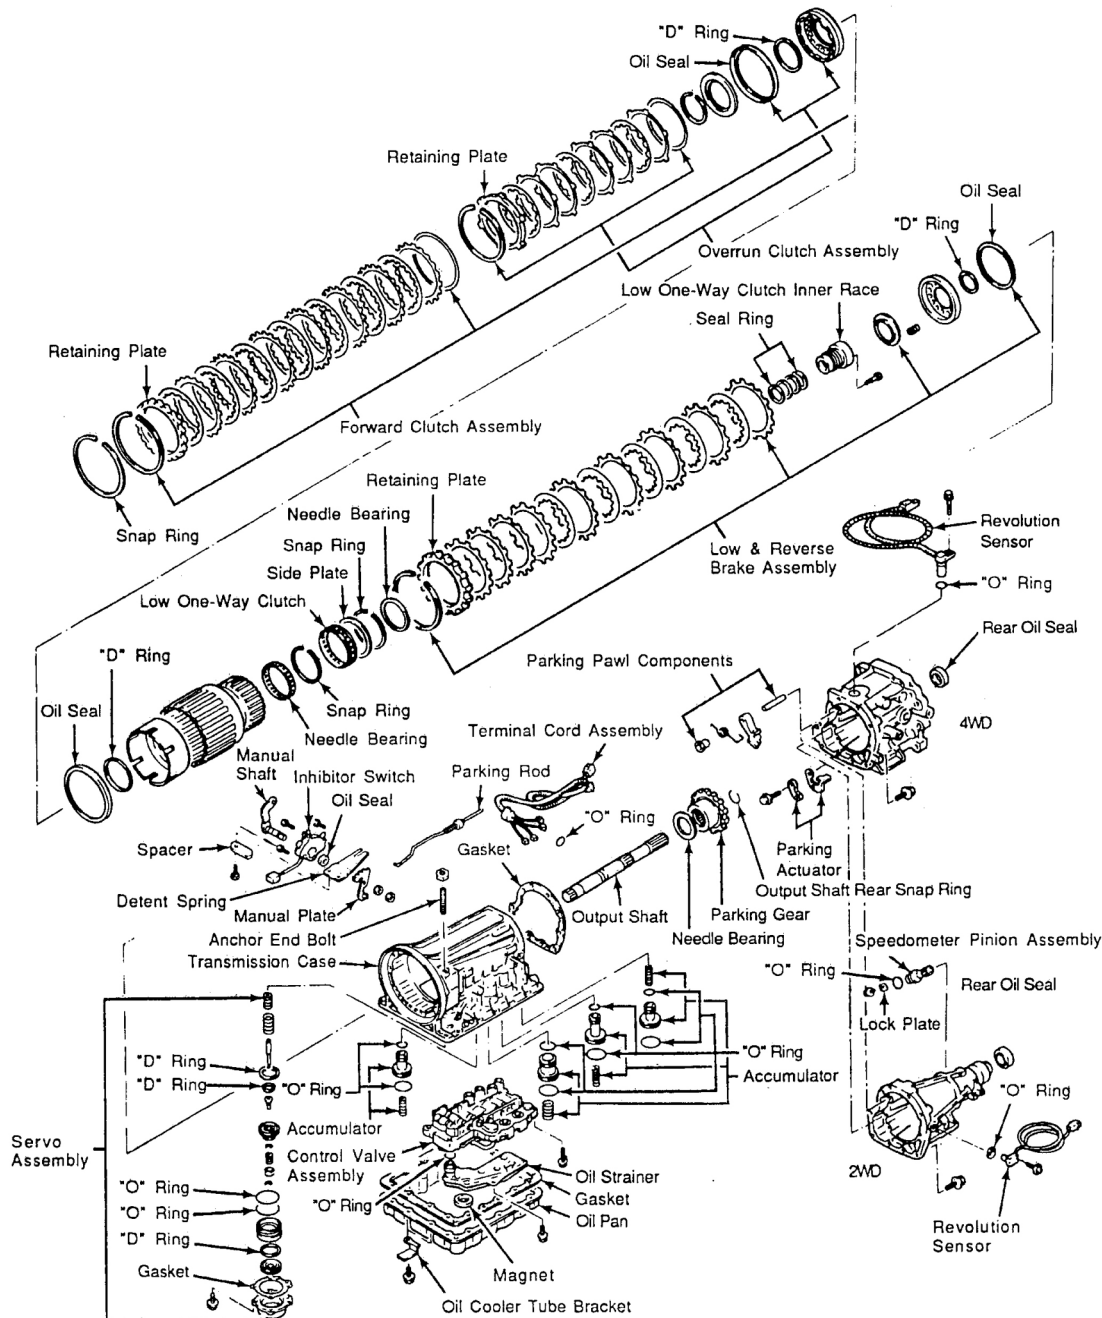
Exploded View Transmission Assembly (RE4R01A & RE4R03A) (1 Of 2)
